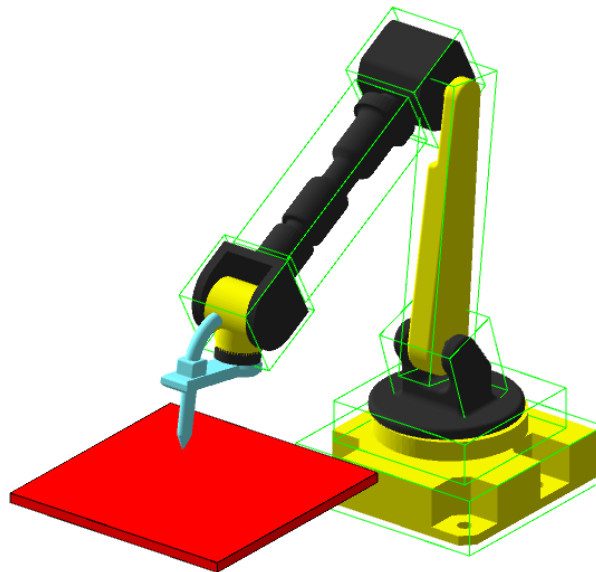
Welding two sheet metal parts along the path requiring linear and circular motion.
